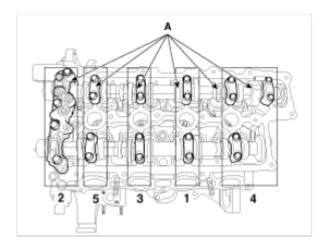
Identifying Camshaft Bearing Caps Installation Sequence Courtesy of HYUNDAI MOTOR AMERICA
